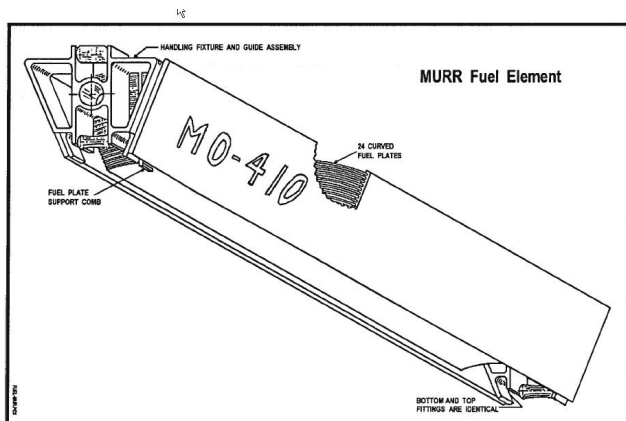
Three-Dimensional Sketch of MURR Fuel Assembly.
